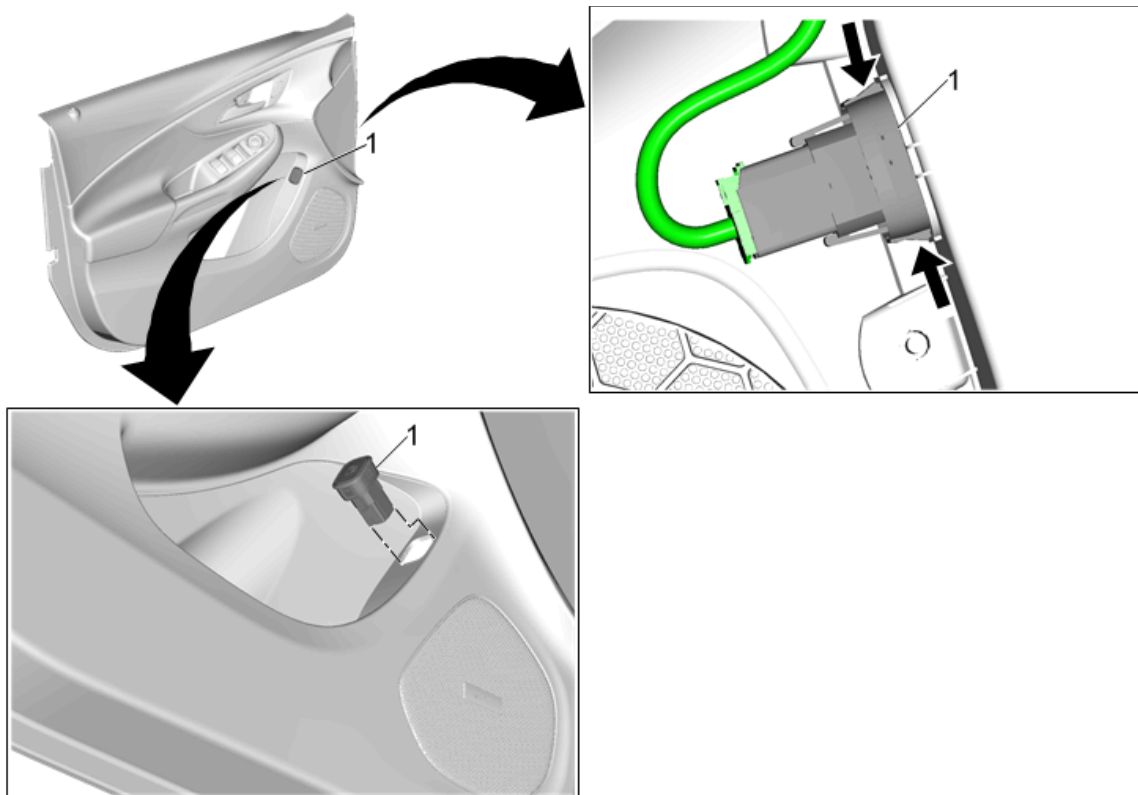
Fuel Tank Filler Door Lock Release Switch
